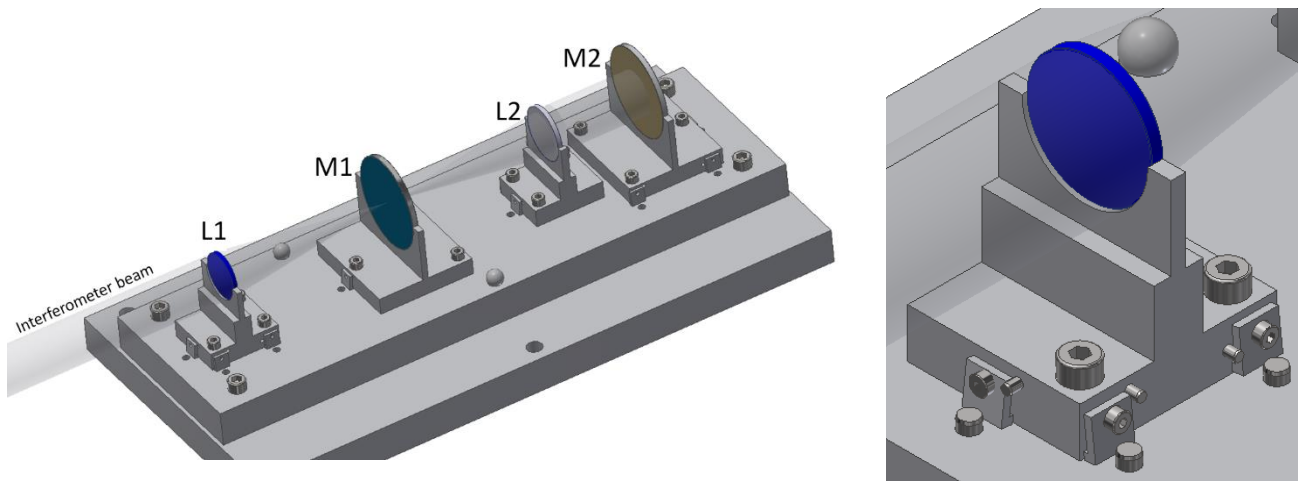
Mechanical design of the dummy system. Left: overall view with optical beam (semi-transparent). Right: detailed view of a single mount.
